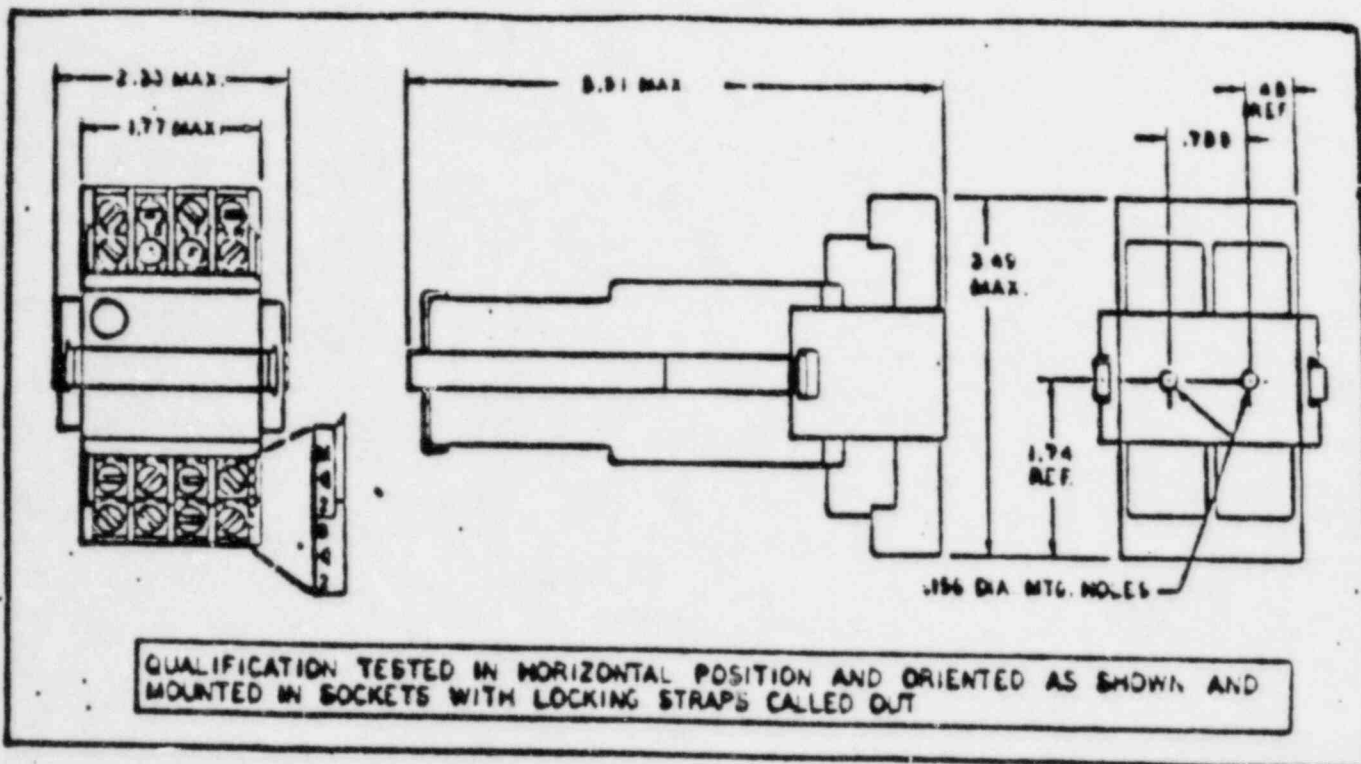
Model EGP Relay with ECR0001-001 Socket (with captive clamp terminals) or ECR0002-001 Socket (with screw terminals) and ECR0133-001 Locking Strap. (From Product Spec. EGP, Rev. F dated 11/5/81)
